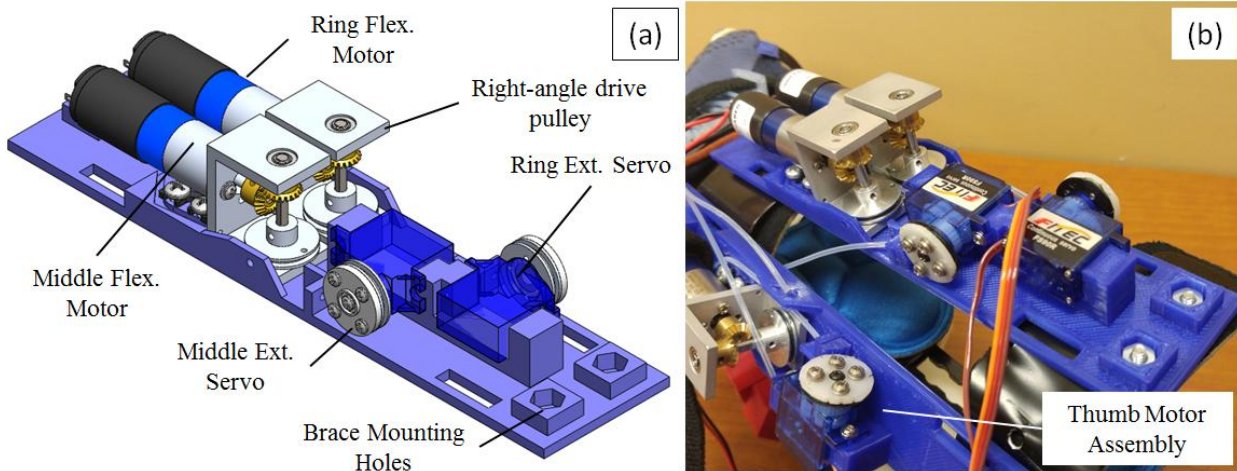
Isometric view of palmar motor assembly, containing middle and ring finger flexion and extension motors. An identical motor plate is mounted on the dorsal side of the forearm housing the index and pinky finger motors. A modified version which houses only the thumb flexion and extension motors is mounted on the lateral side of the arm. (b) Palmar motor assembly mounted on HEXOES.
